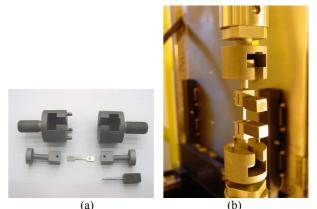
Fixture for the tensile test of the pin-loaded specimen.
